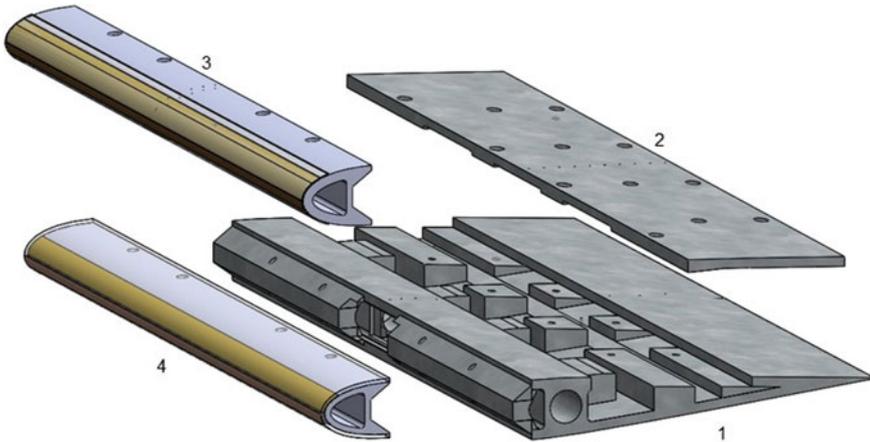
Expanded schematic of the tail-panel airfoil for two-dimensional wind tunnel testing, showing: the main element (1); the lower cover (2); the removable leading edge modules [without recess (3), with recess (4)]
